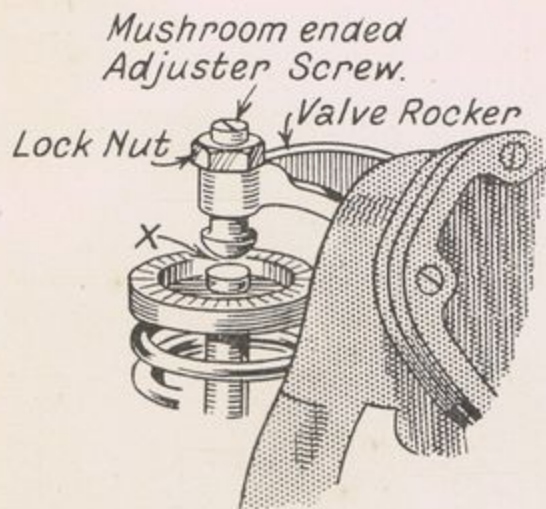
THE OVERHEAD ADJUSTMENT ON THE "REDWING 90" ENGINE
